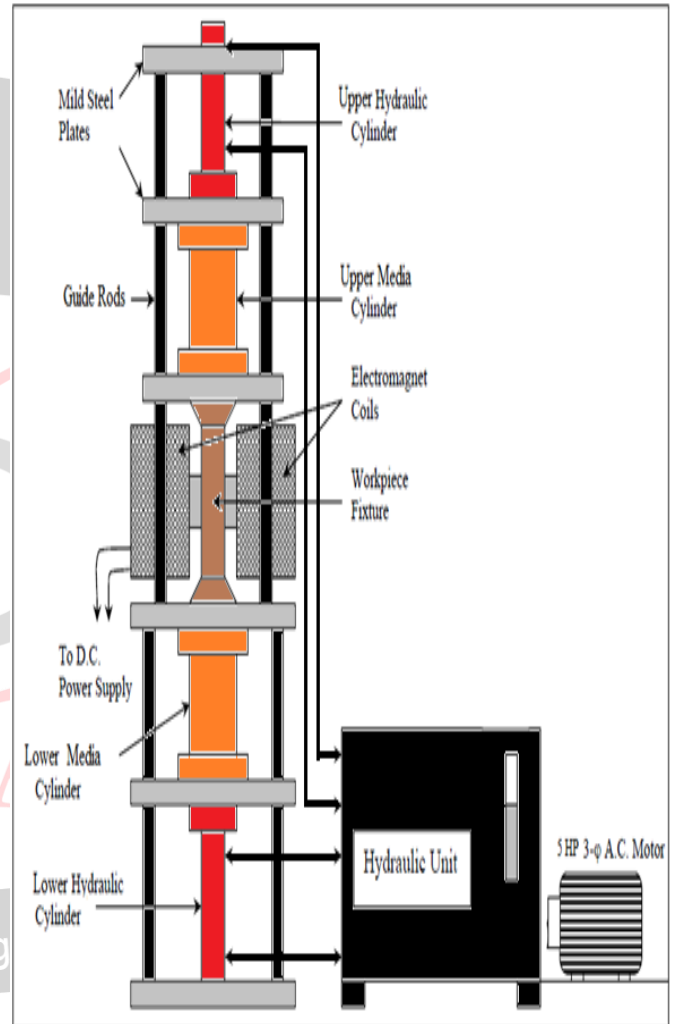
Schematic illustration of magnetic abrasive flow machining (MAFM) process
